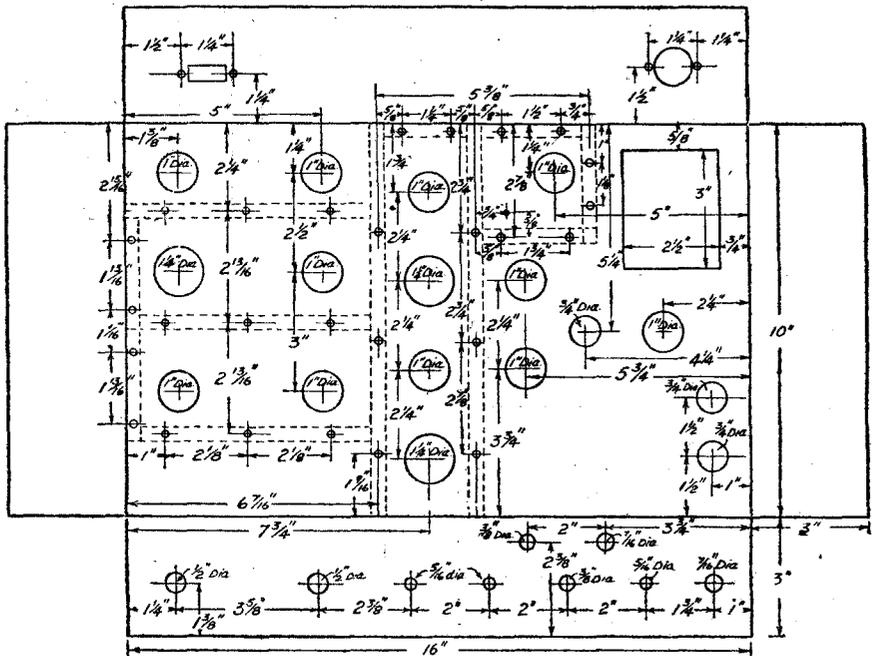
Drilling and cutting dimensions for the chassis of the Air-Hawk 9.
